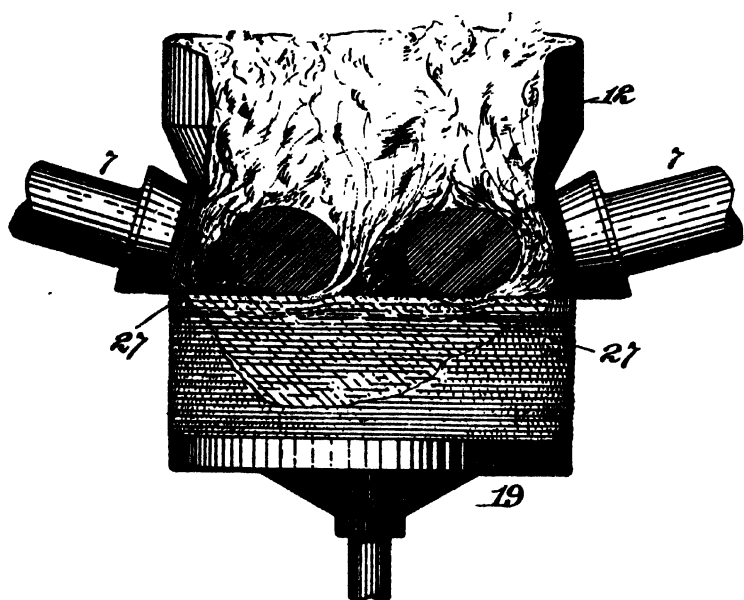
Ginny Compress, End Packed Cylindrical Bale.
